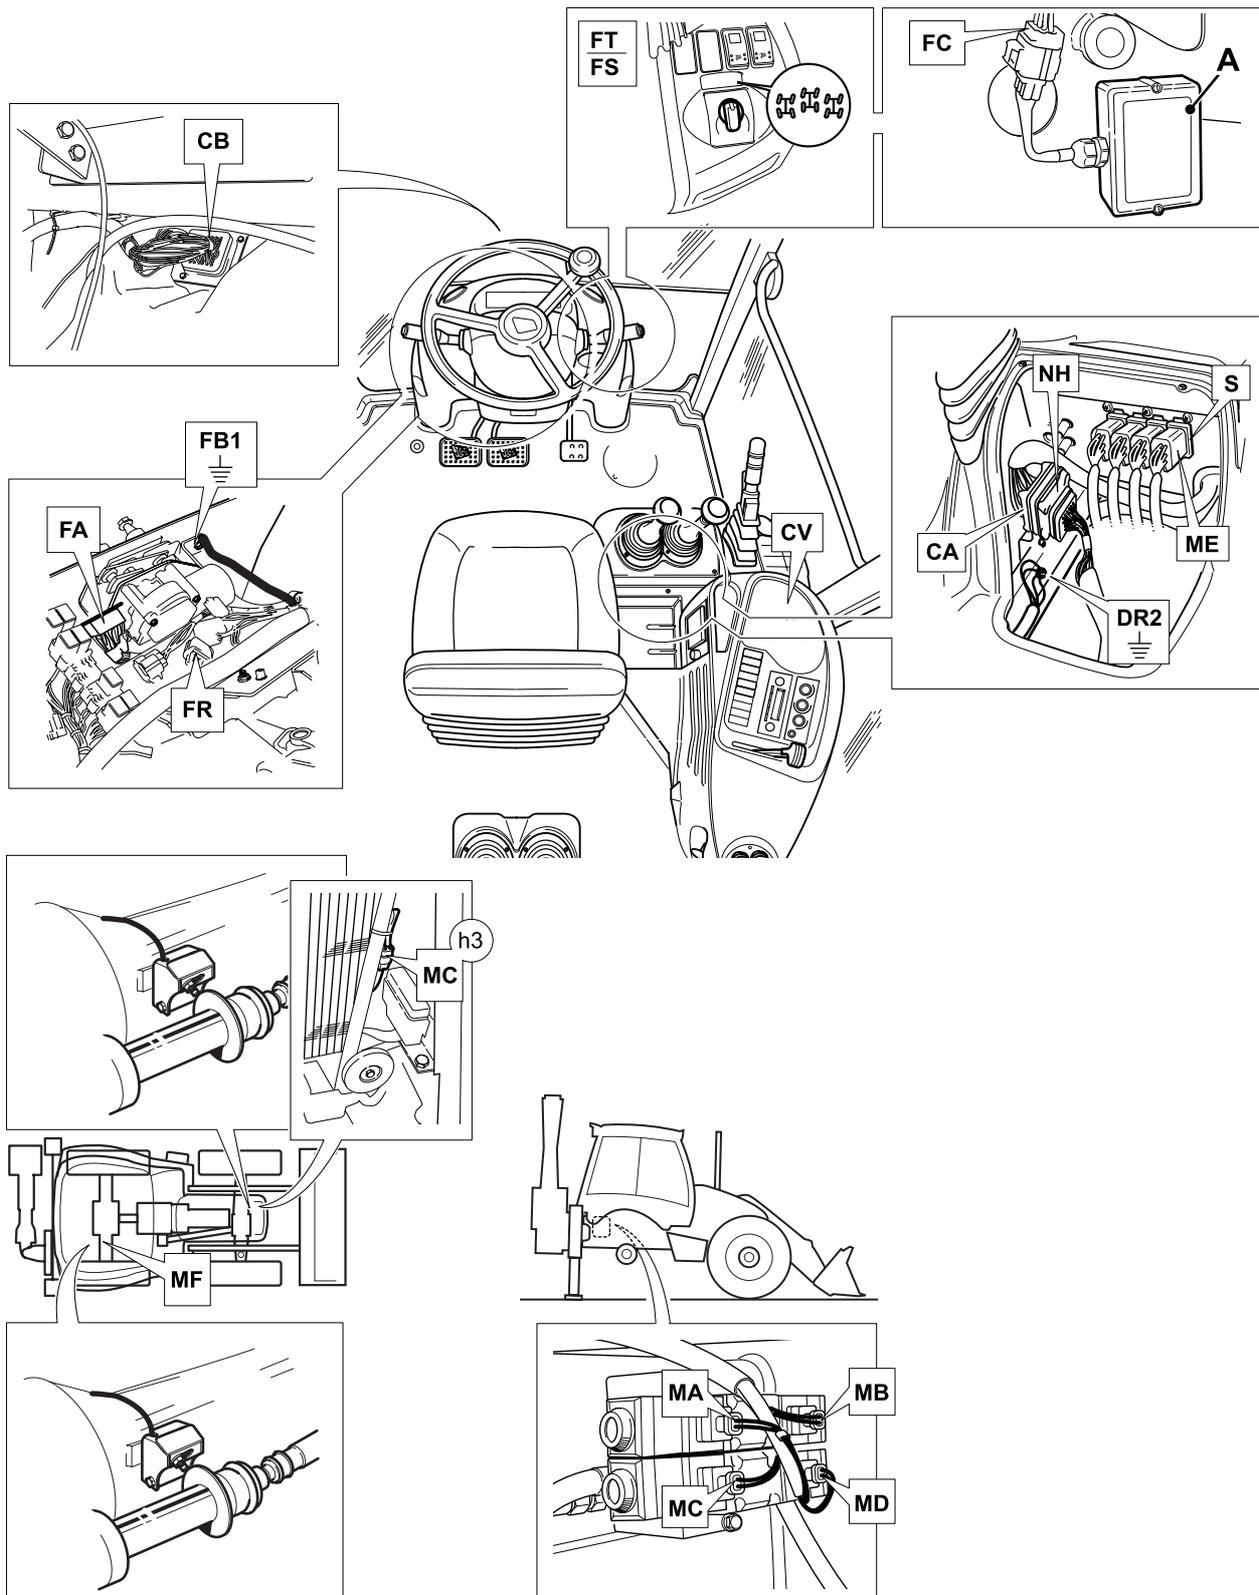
Component and Connector Locations - PCB (Relay) Controlled Steer Mode
